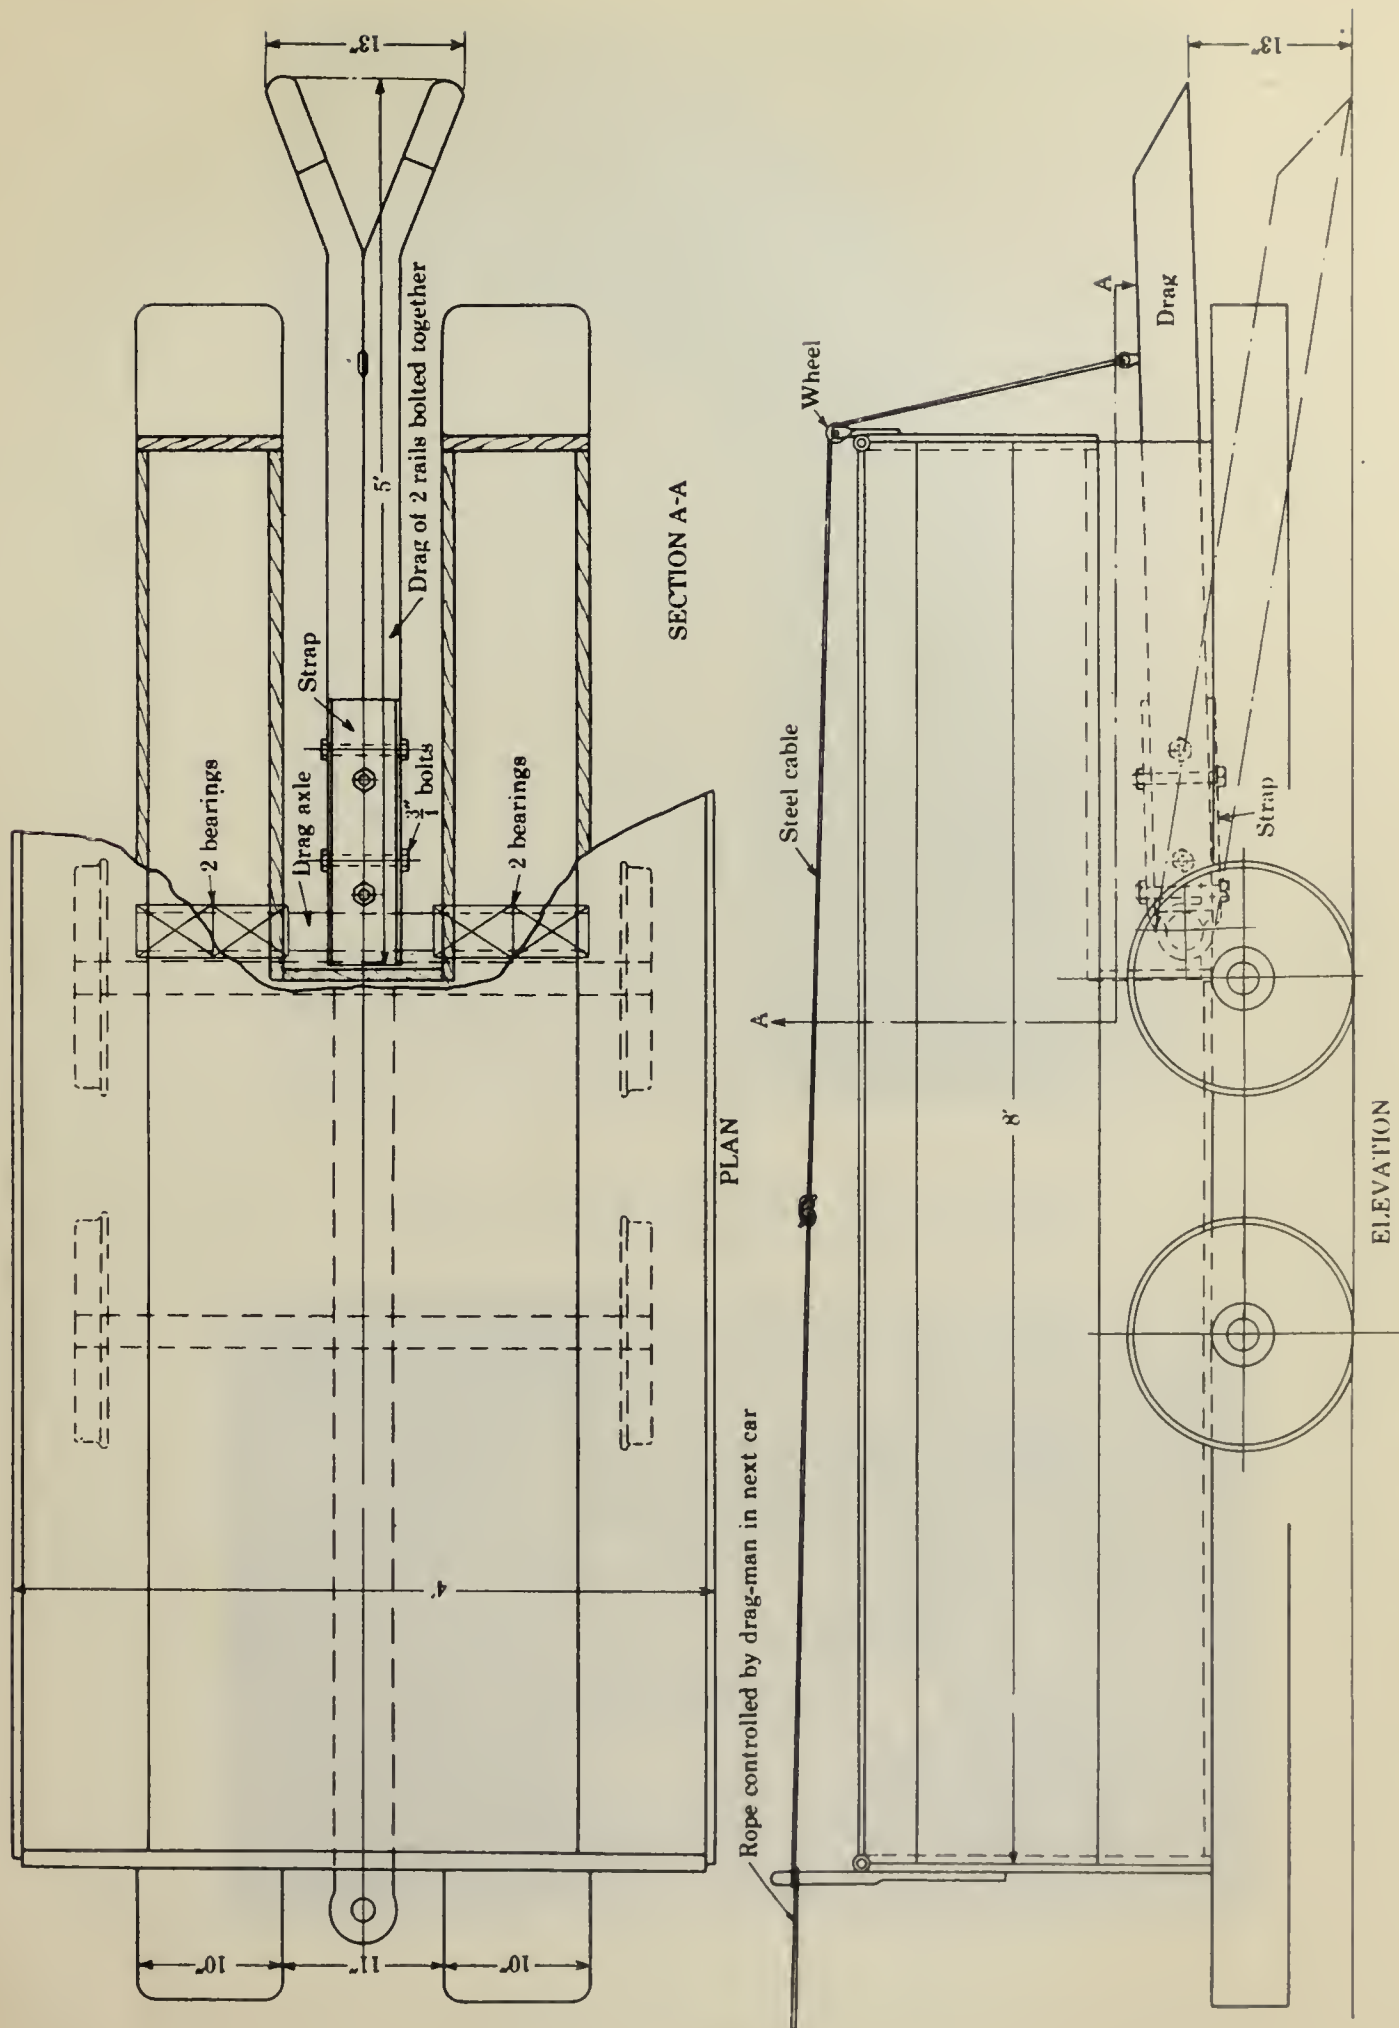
Plan and elevation of drag car used at Mine F at time of runaway trip
